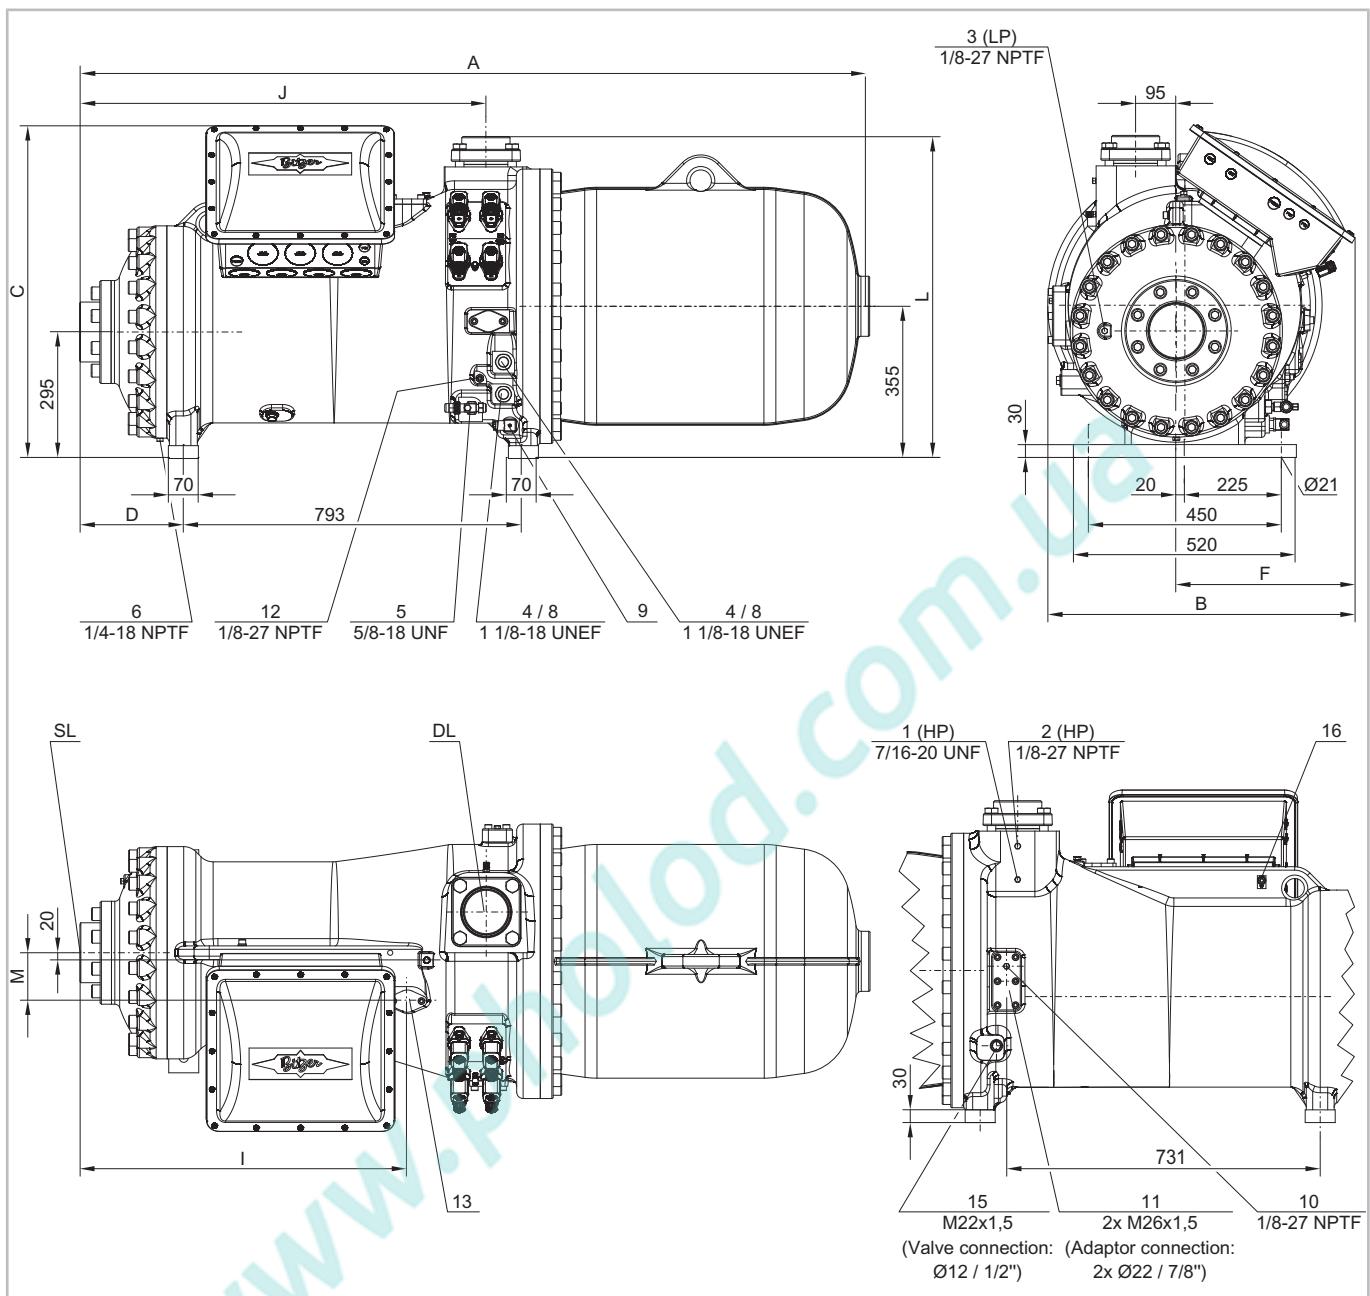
Dimensional drawing CSH9553-180(Y) .. CSH95113-320Y
